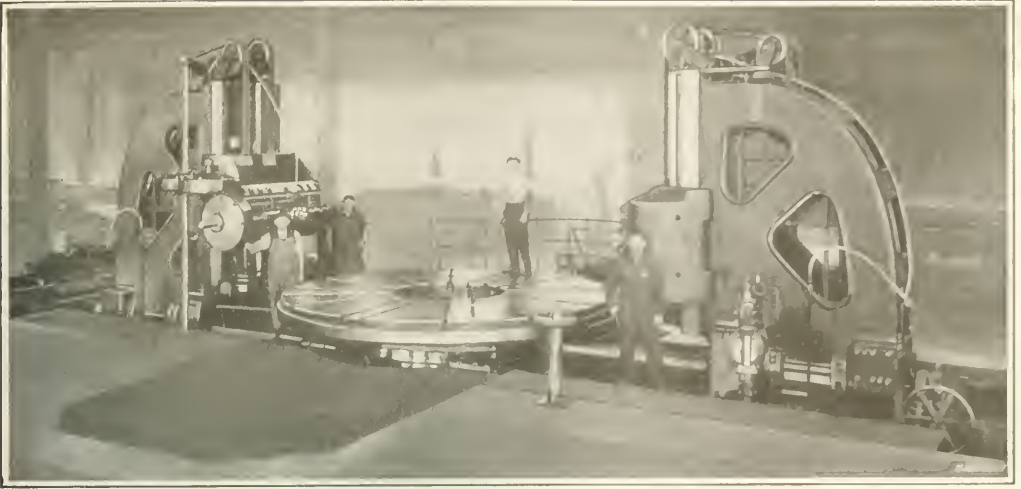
Machine with Work removed from Table—Attention is called to Pit at Far Side of Machine in which All Driving Mechanism is located
